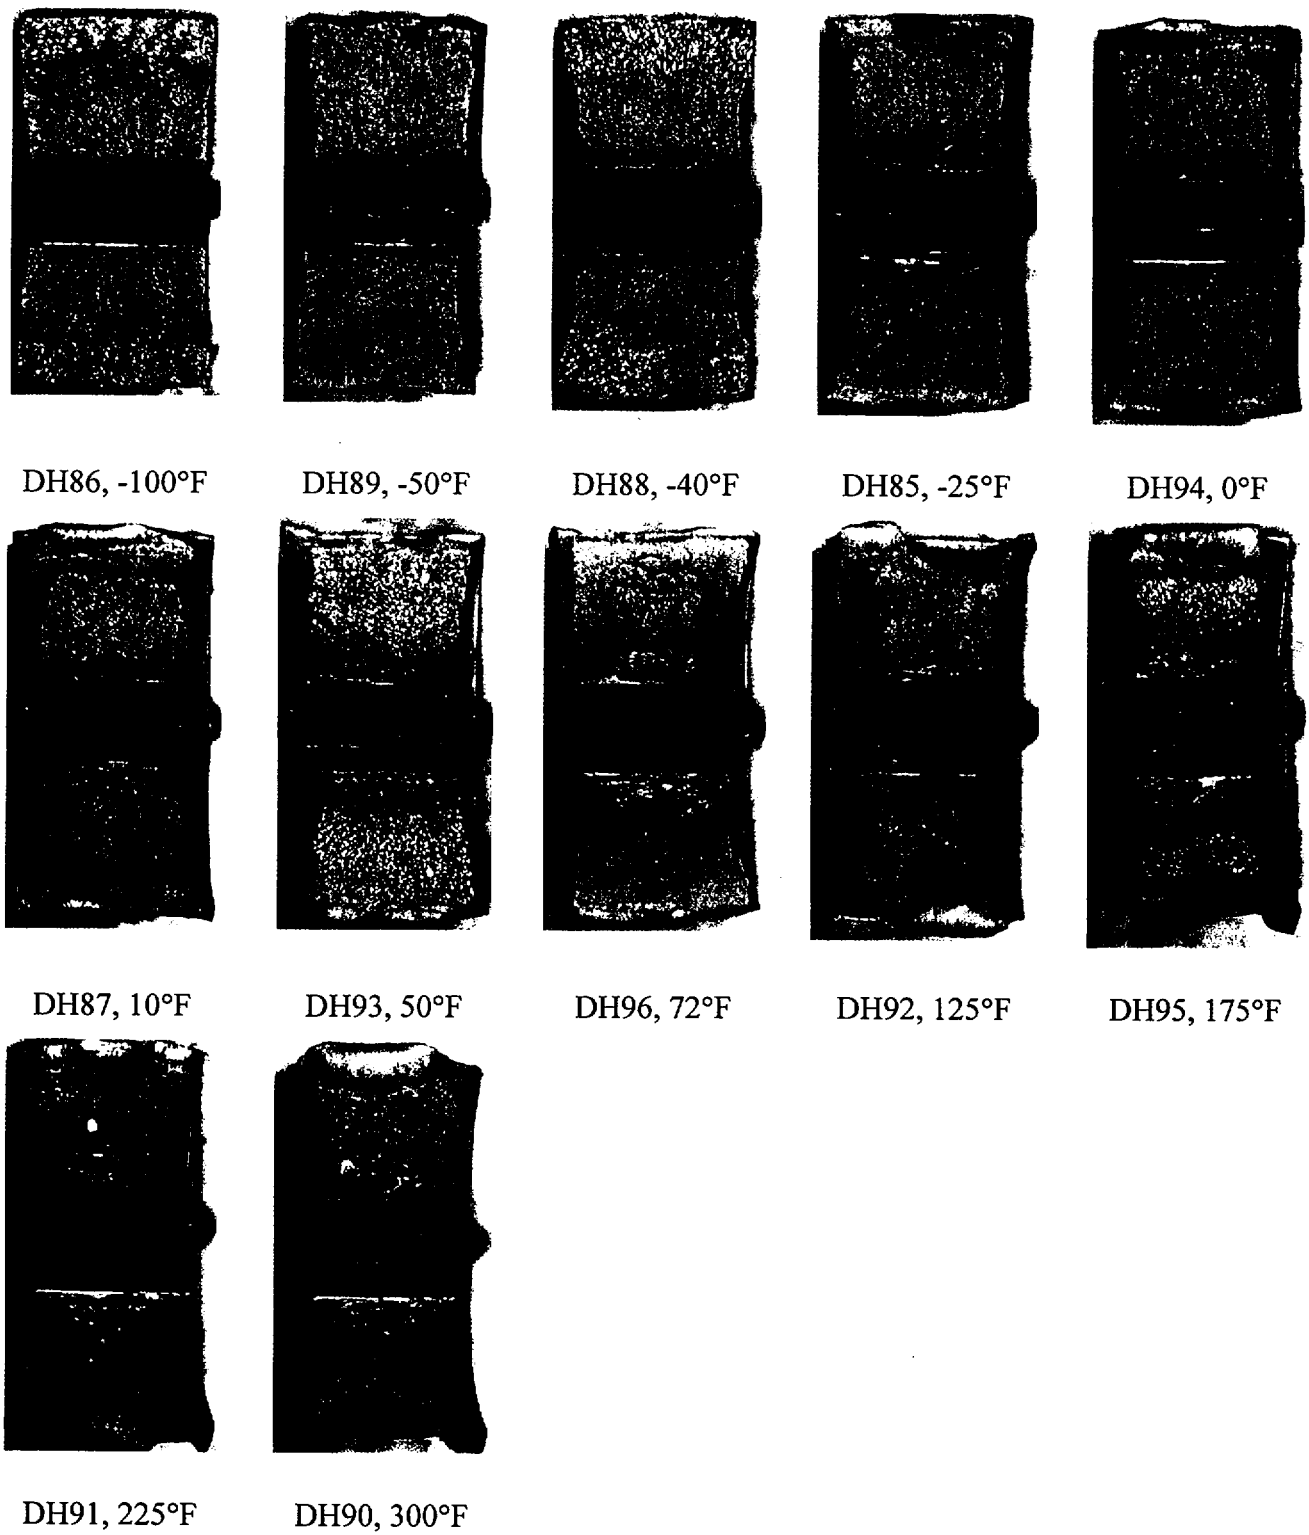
Charpy Impact Specimen Fracture Surfaces for Beaver Valley Unit 1 Reactor Vessel Heat-Affected-Zone Metal
